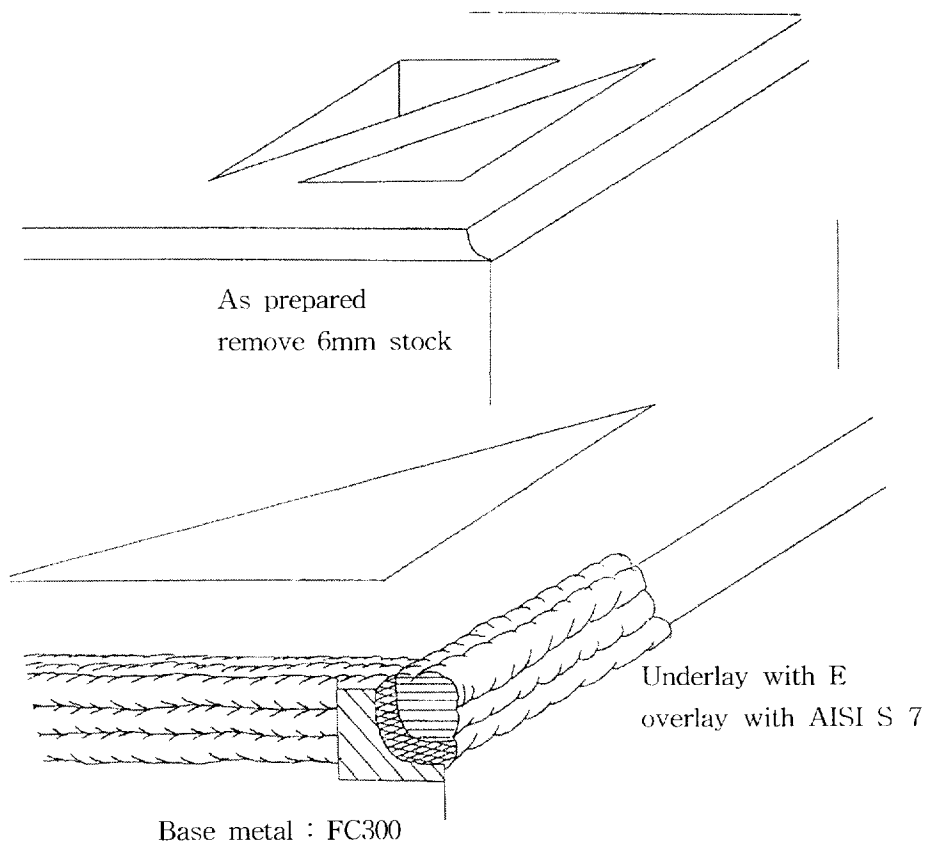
Prepared FC300 and schematic of welding
